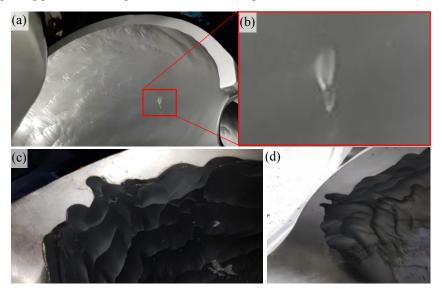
Aggressive erosion is caused by a combination of effects. a & b) welding reparation defect with erosion on the inner surface at Chiclayo Peru. c & d) Cavitation on the outlet edge at Ancash, Peru.
